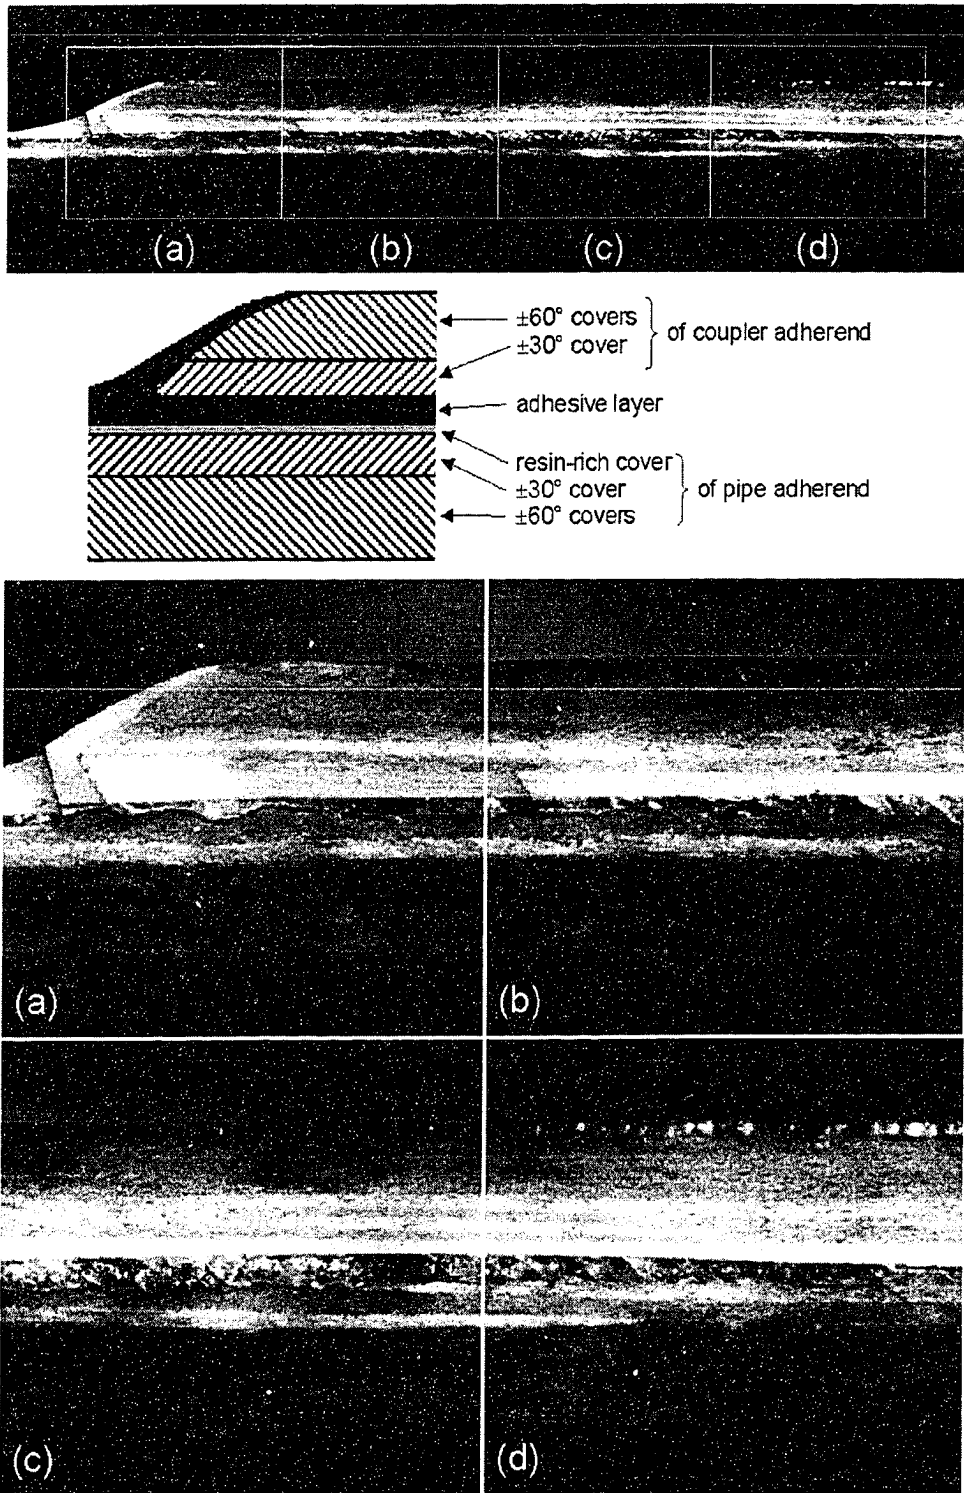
Photograph, schematic and magnifications of partial joint fracture.
